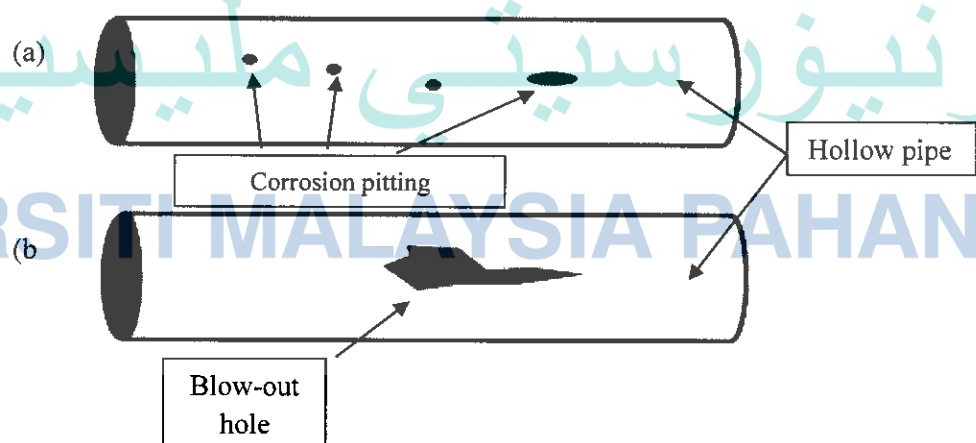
(a) Corrosion pitting and (b) Blow-out hole
